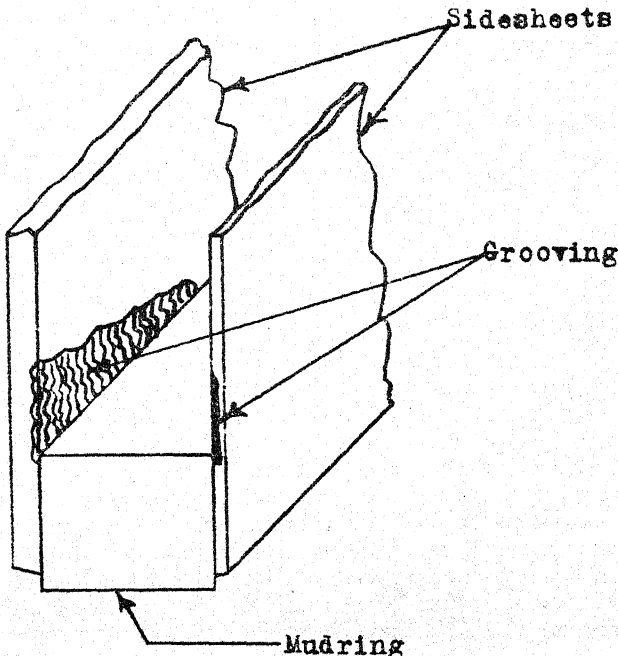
Plates at mudring of riveted boiler often develop grooves.
